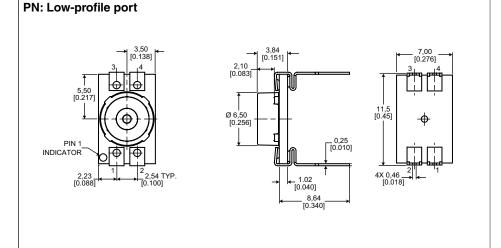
Leadless SMT Package Dimensional Drawings (For reference only: mm [in])
